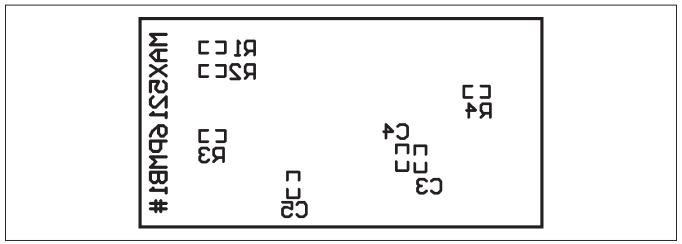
MAX5216PMB1 Peripheral Module Component Placement Guide—Solder Side
